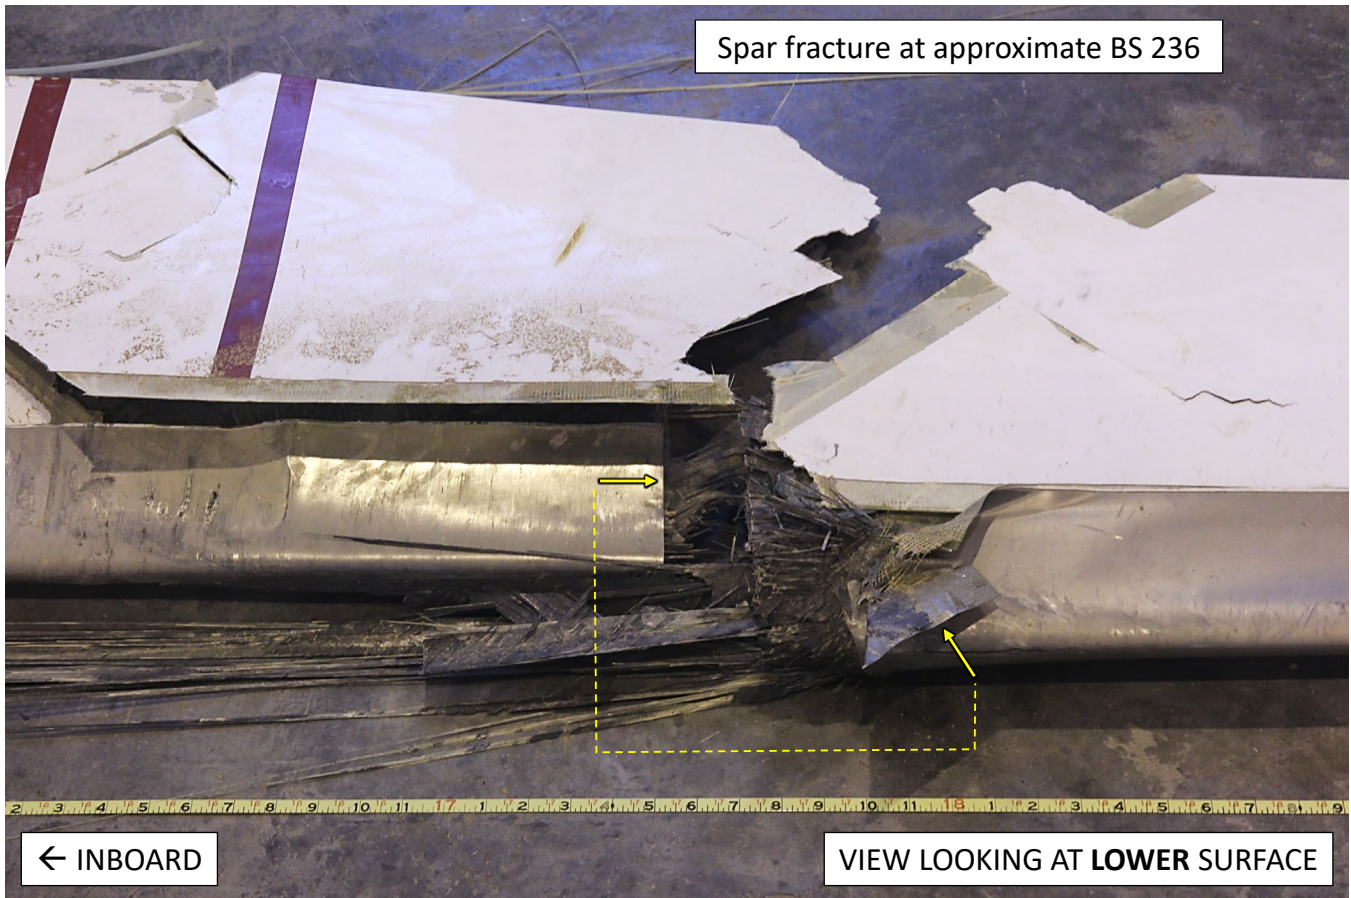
Photograph of the red blade leading-edge cap flat fracture at the BS 236 fracture location viewed from the lower surface. Yellow arrows indicated mating leading-edge cap fracture surfaces.
